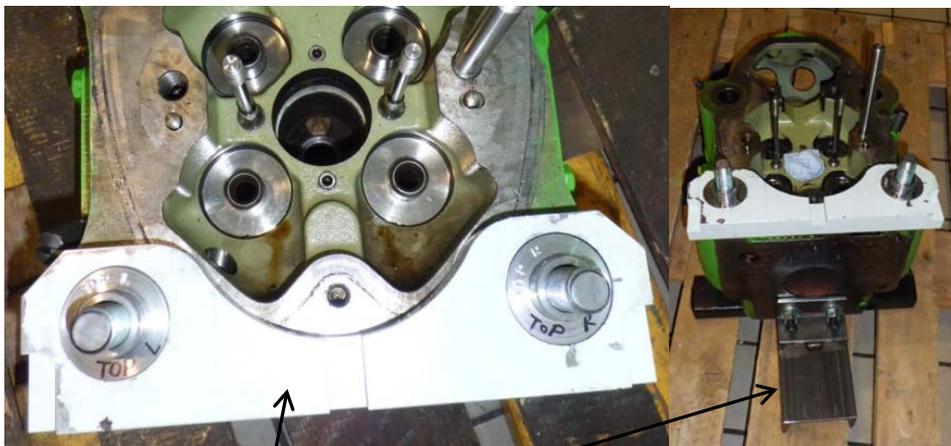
Fit the base plate and angle iron to prevent tipping over
